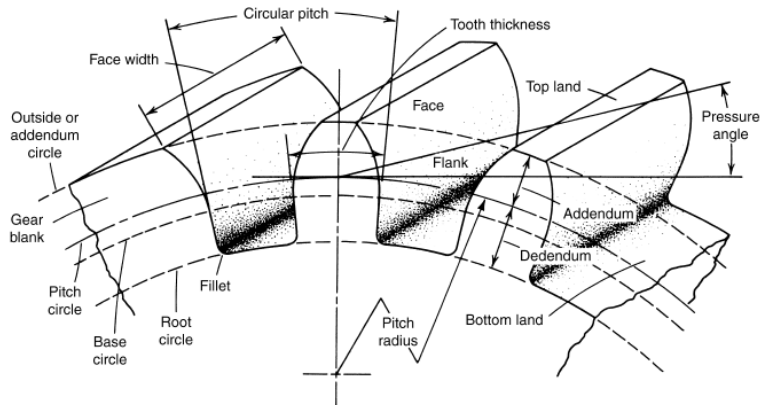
Gear nomenclature - Schematic of typical gear nomenclature [27].
